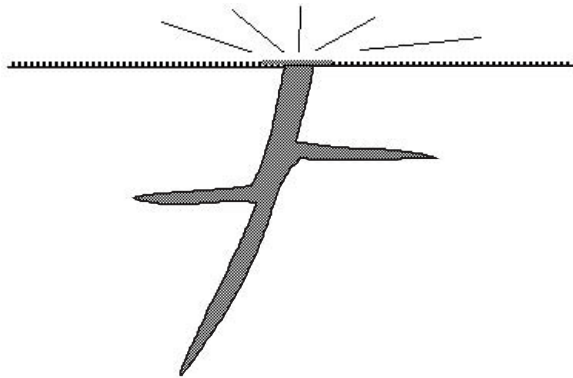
Schematic representation of part after excess penetrant has been removed and developer applied.
